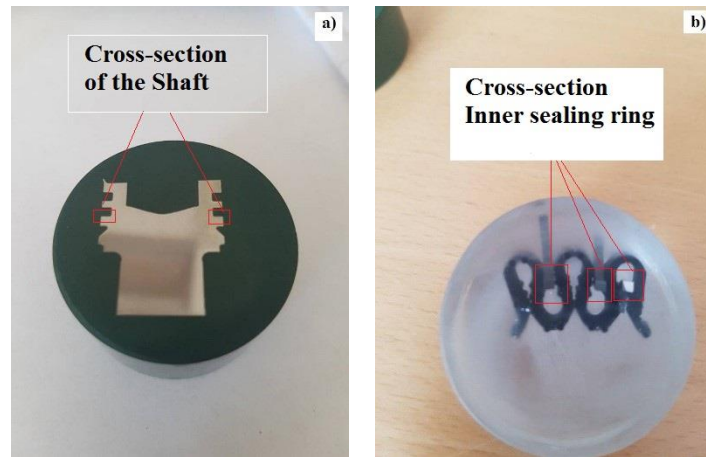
In a) molded cross-section of the shaft and in b) the cross-section of the sealing ring.
